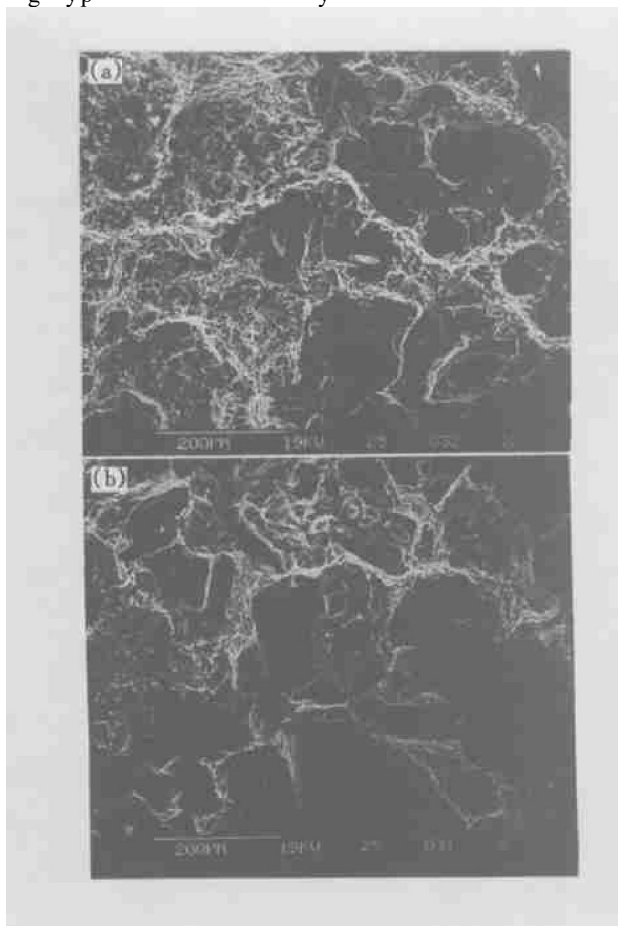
Morphologies of fracture surface of semisolid forming sample (a) and gravity die casting sample (b)
